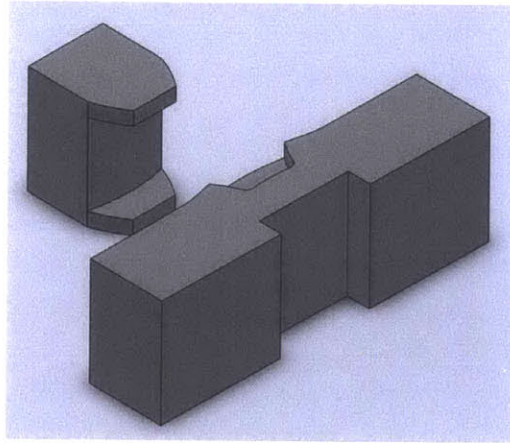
The gear tooth and slot disengaged in an isometric to show both the gear that maintains alignment, and the rolling surface that bears the large load.
